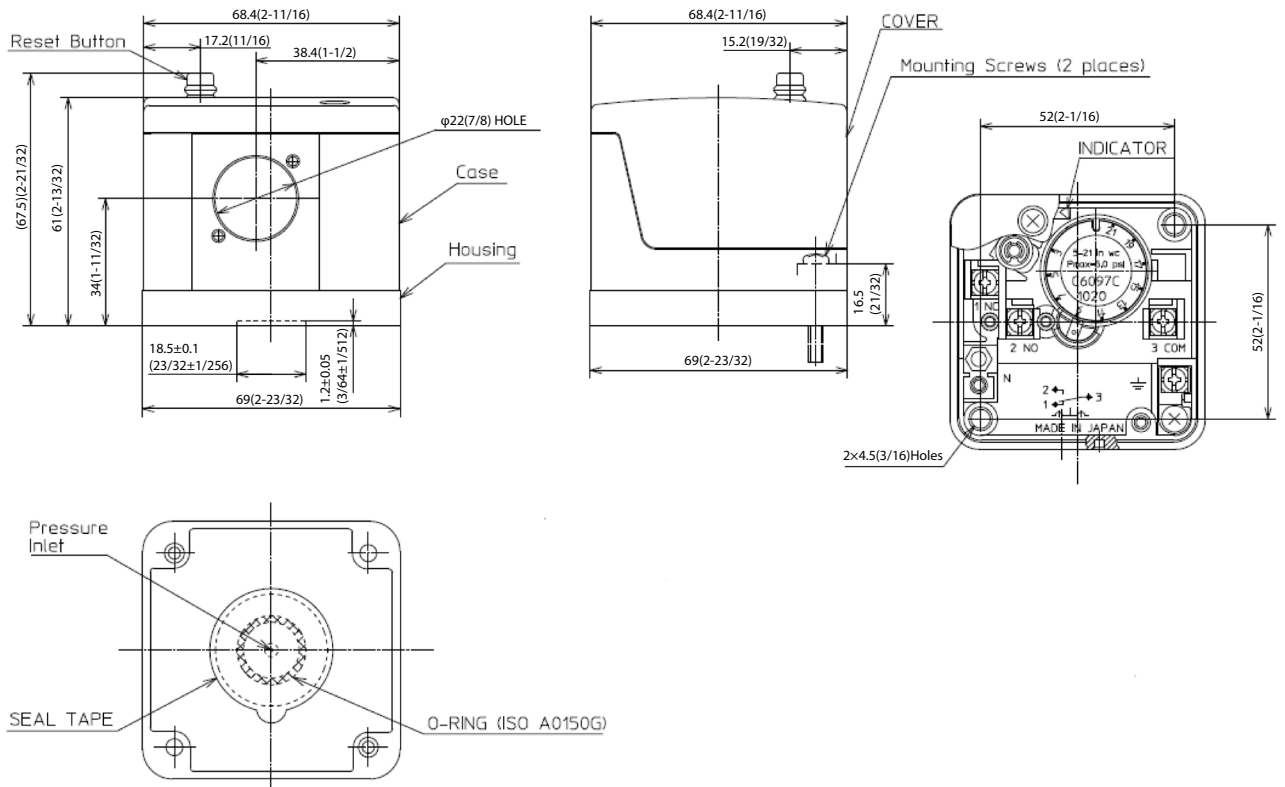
C6097C, D Flange Mount dimensions in mm(in.)
